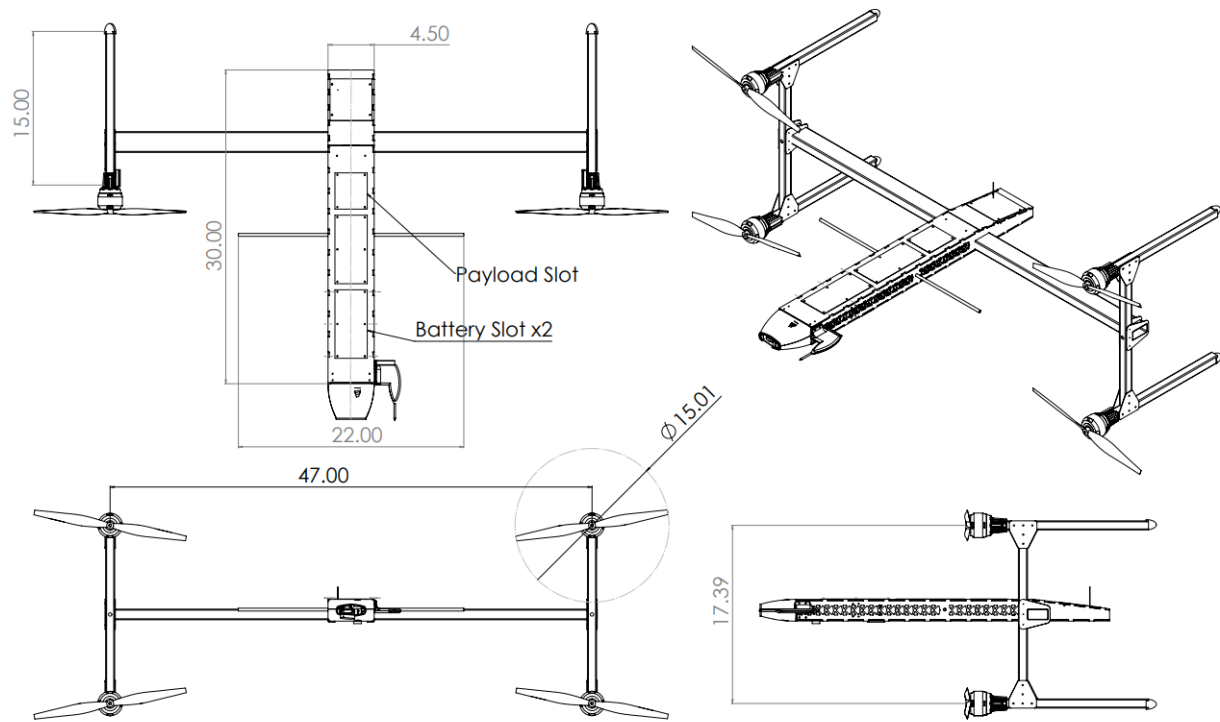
Three View and Isometric Drawing of the Aircraft. Dimensions are in inches. Wings are hidden to show the internal structure and components.
